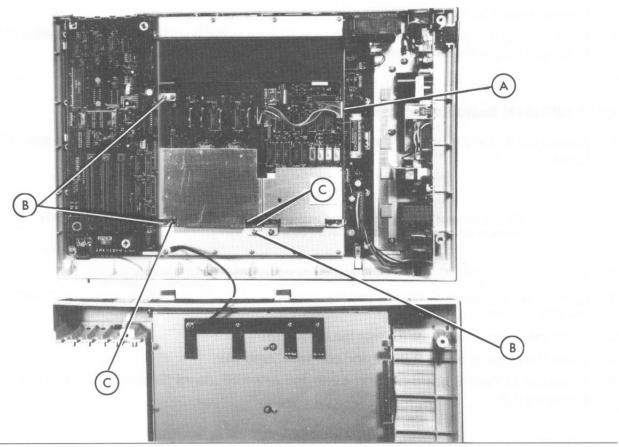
APX-ICRT BOARD REMOVAL/REPLACEMENT
